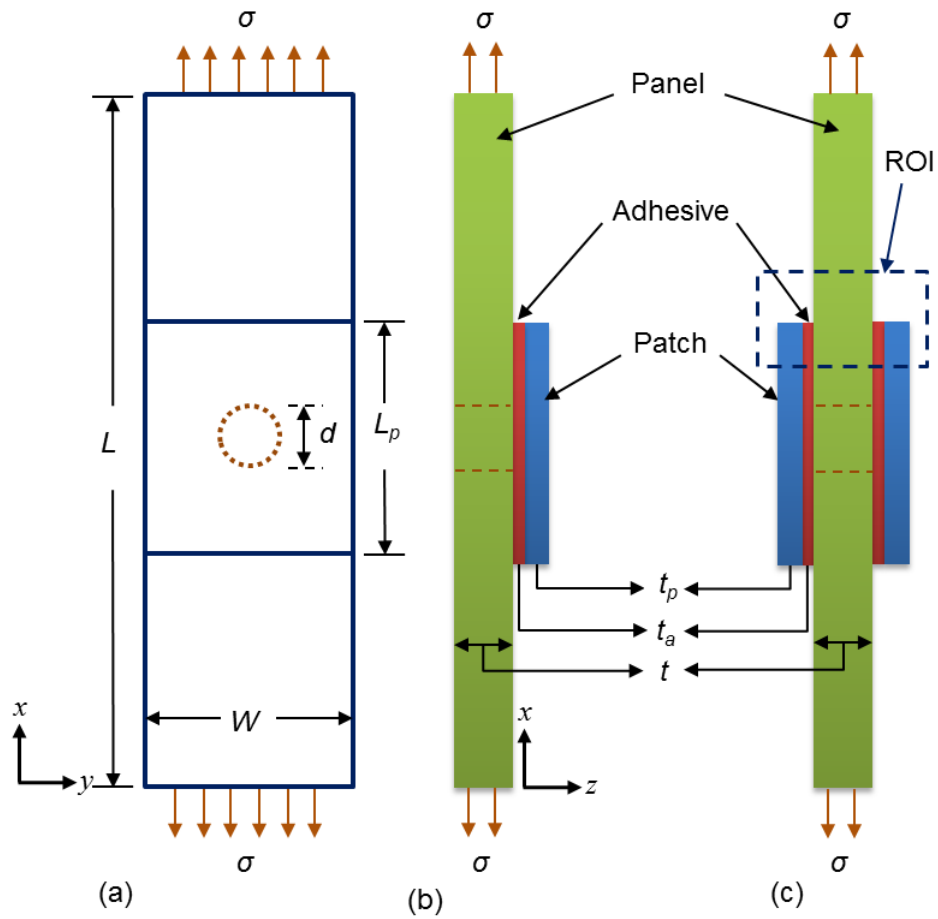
Specimen geometry of adhesively bonded patch repaired CFRP panel (a) front view (b) side view of single sided repair configuration (c) side view of double sided repair configuration
